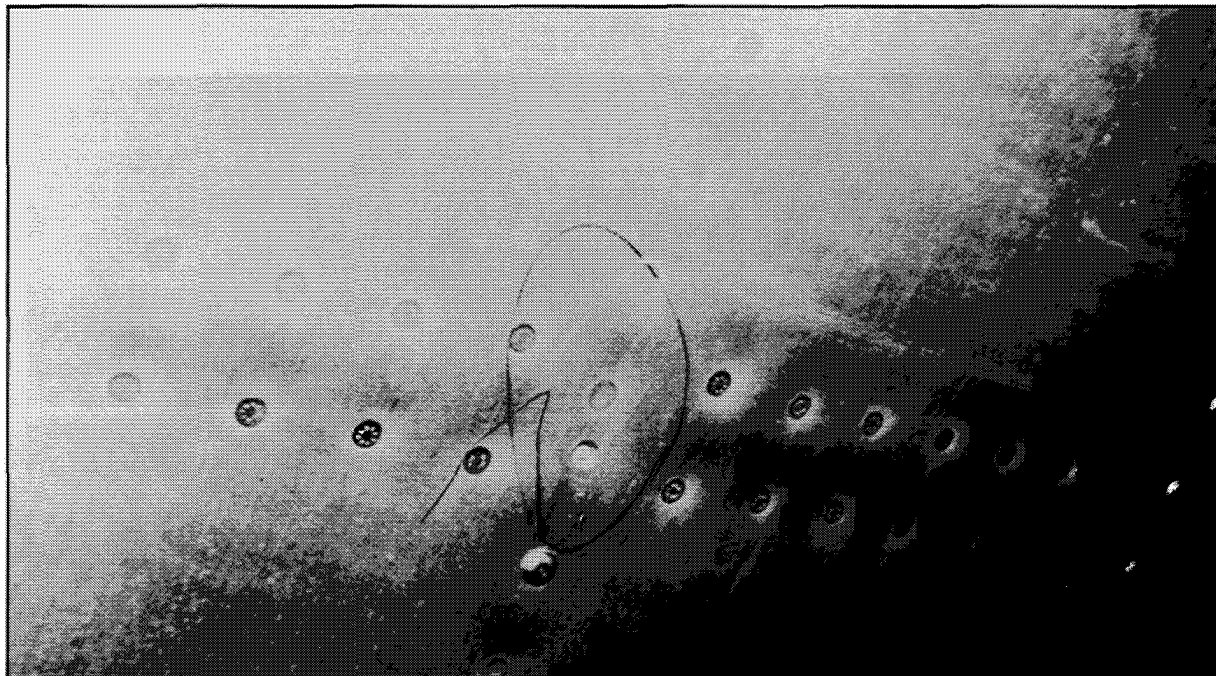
POPPED RIVET HEADS RESULTING FROM CORROSION PRODUCTS
